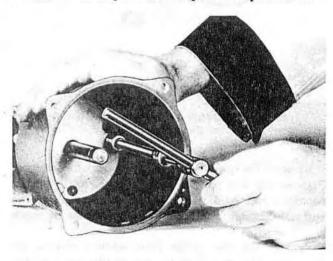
Removing the Vacuum Cylinder Shell Cap Screws
